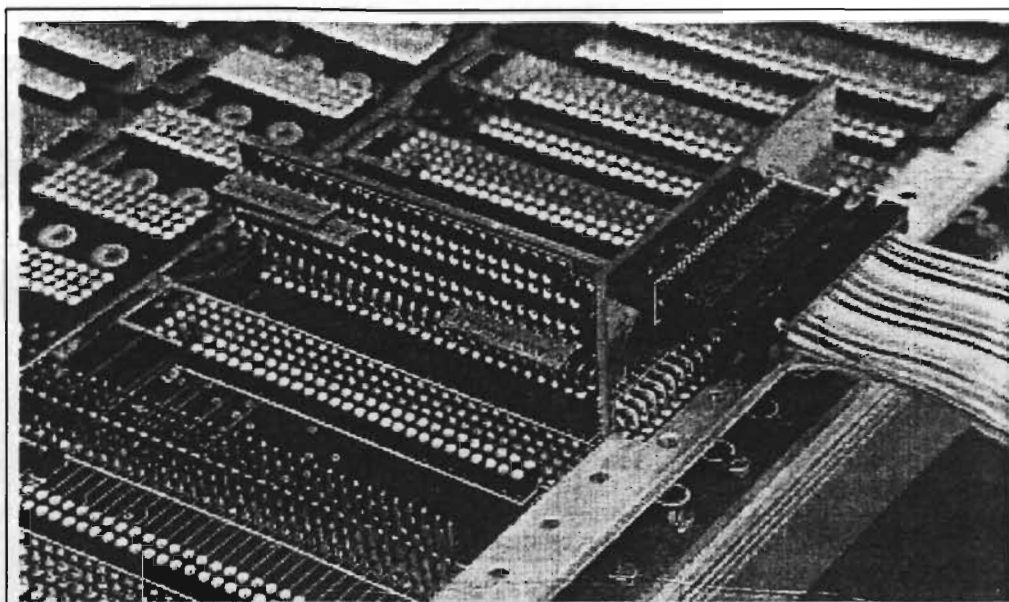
The MAC Backpanel Auxiliary Cards (SMT-to-DIP Type II)
